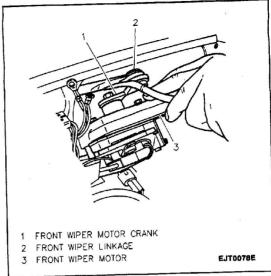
Disconnecting Front Wiper Linkage From Front Wiper Motor
